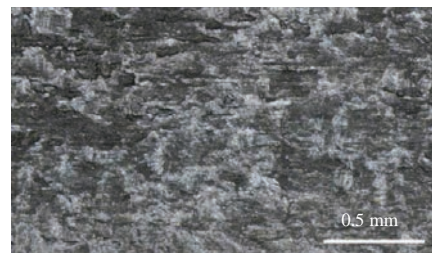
Workpiece surface after forming with T1 dry ($v_f = 500$ mm/min).
